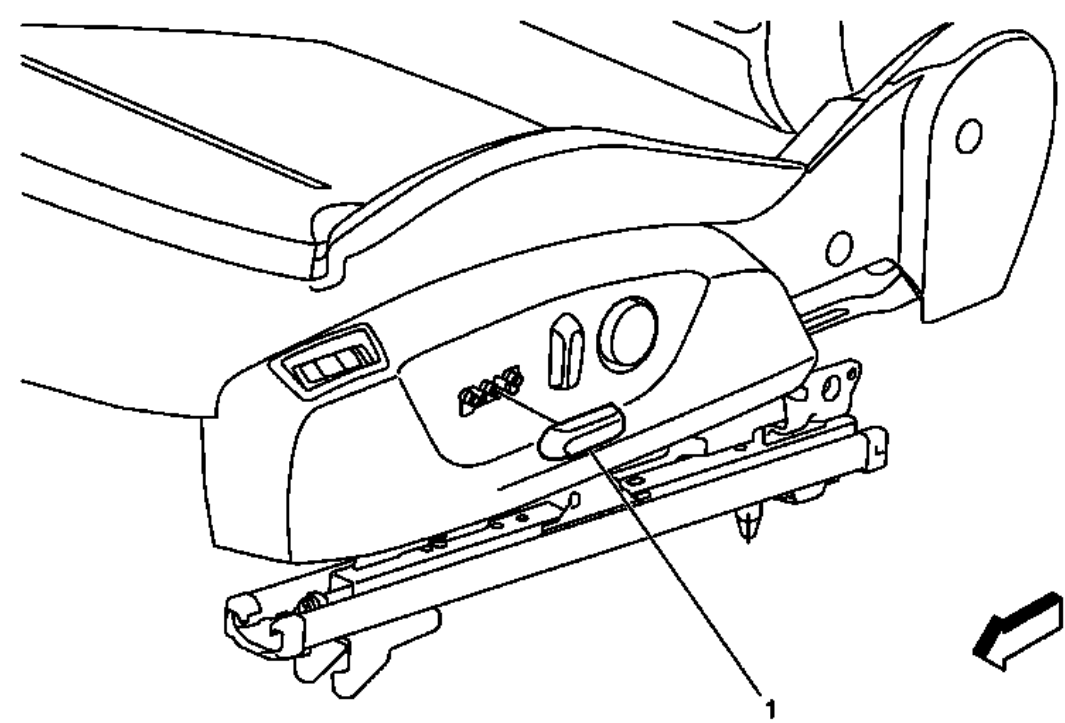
Front Seat Adjuster Knob (Lower - 8-Way-Power)
